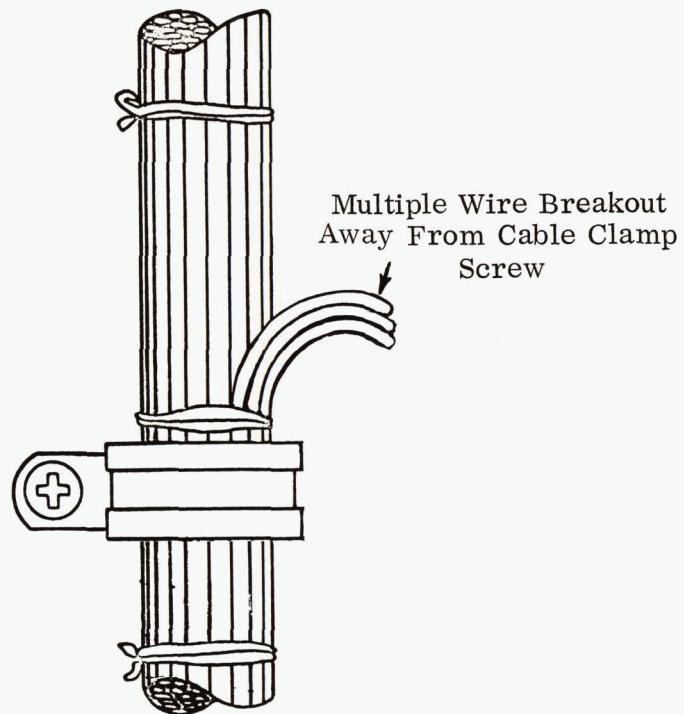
Method of Wire Bundle Breakout at a Clamp
